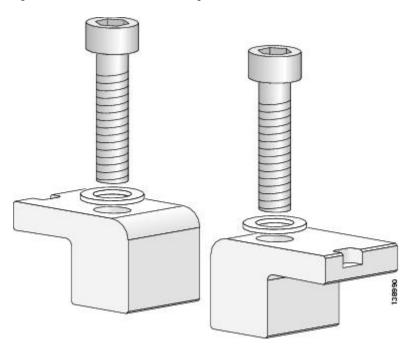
Alternate Chassis Floor-Mounting Kit Blocks
